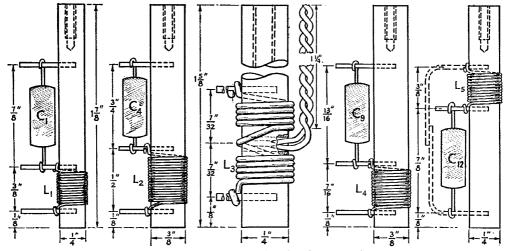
Details of the coils used in the 300-ohm filter. Note that the scale of the center coil is enlarged, to show details more clearly. The form is drilled to permit bringing the center-tap leads through the form as shown. They are cleaned, twisted together, and soldered.
